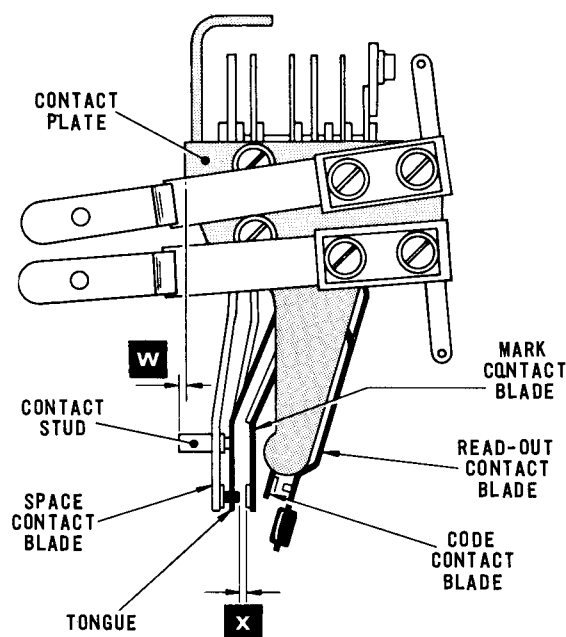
TRANSMITTER UNIT—FRONT VIEW
